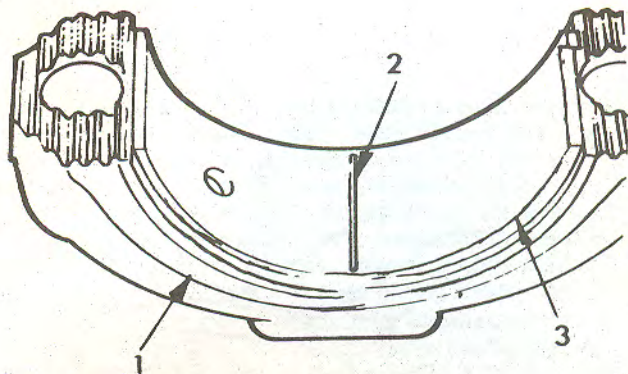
When checking the running clearance of the big end bearings, insert the "Plastigage" strip as shown into the bearing shell, fit the bearing cap to the crankshaft and tighten the bolts to the specified torque reading.
